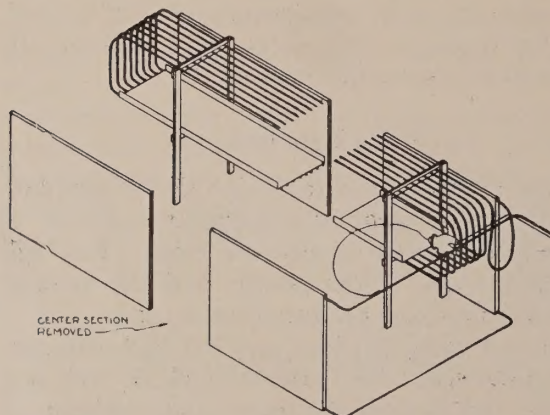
(Left)—A view of the refrigeration coils using 21-in. plates for the front and back of the chest and $\frac{1}{2}$ -in. copper tubing for the freezing shelf. On chests with an overall length of 8 or more feet, two 12-in. plates can be used for the freezing shelf and the rear-21-in. plate may be omitted.
